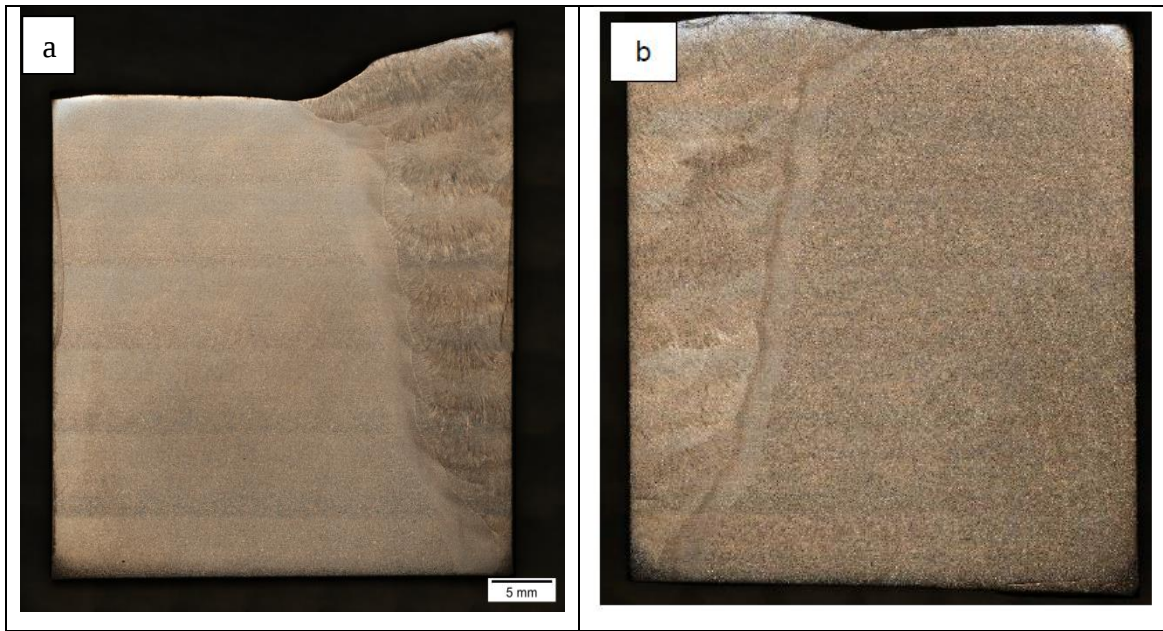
Macrographs indicating the weld metal, HAZ and parent material of (a) the X20 weld filler metal, P91 parent material side and (b) X20 weld filler metal, X20 parent material side.
